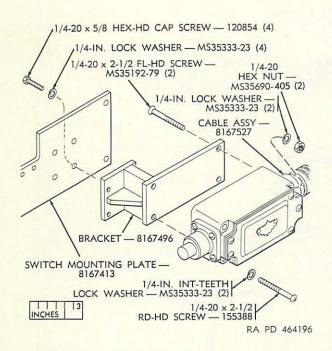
Missile-away switch assembly (1081 through 1089)—disassembly and assembly.
